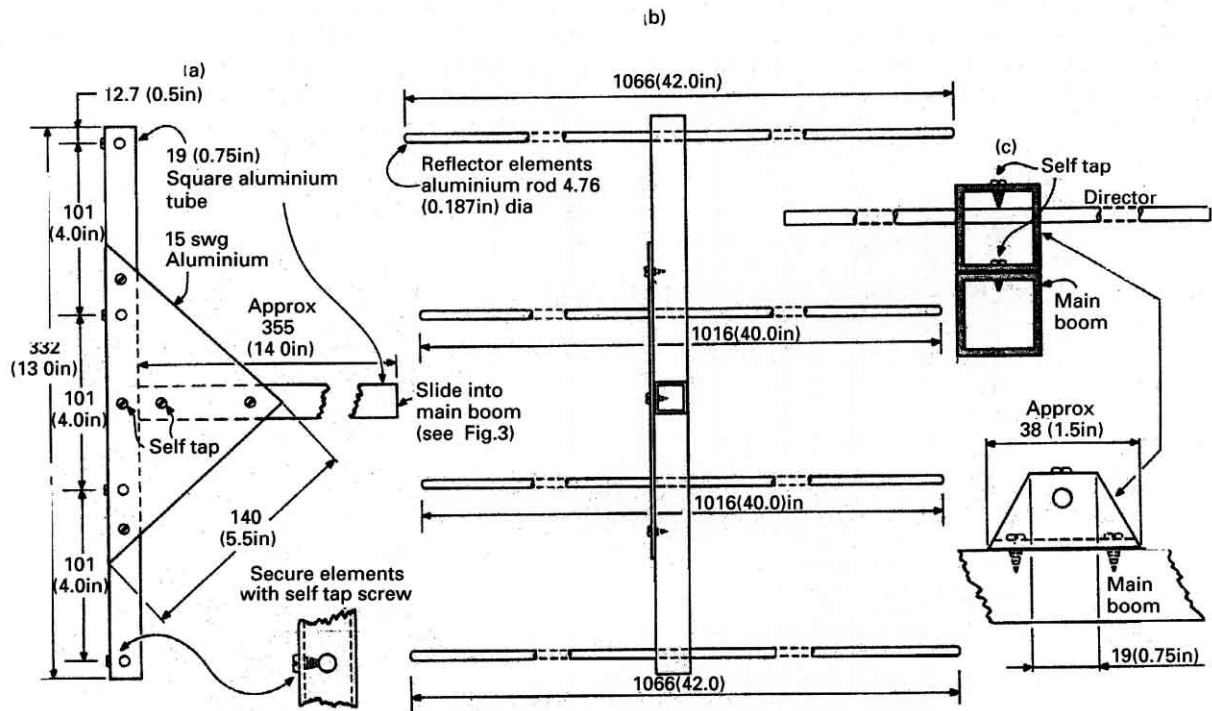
(a) Side view - assembly of plane reflector. (b) Reflector details. (c) Method of securing directors to main boom.
